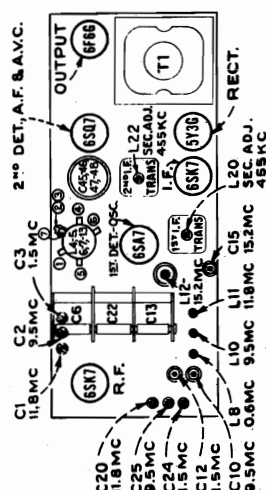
TUBE, TRIMMER AND PARTS LOCATION
